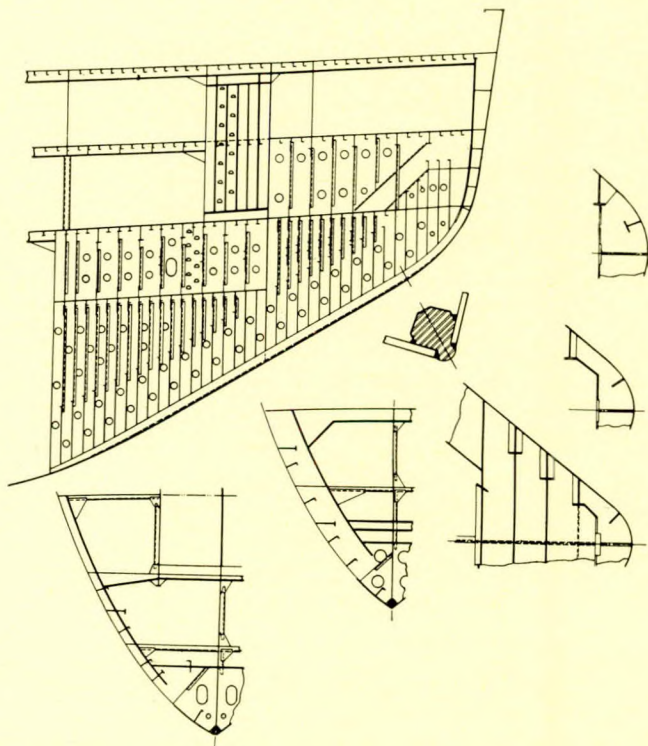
Frame spacing and fore end sections of the d'Iberville
